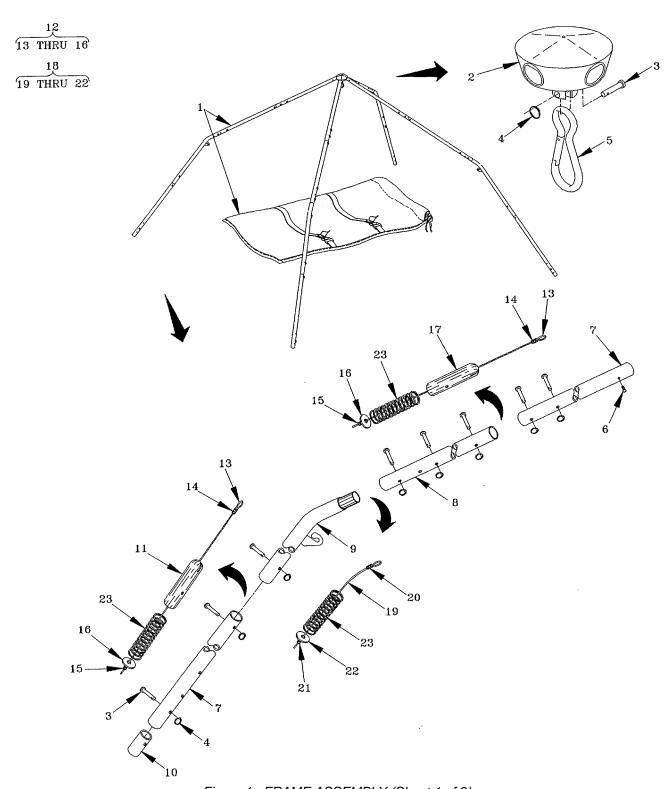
FRAME ASSEMBLY (Sheet 1 of 2)
